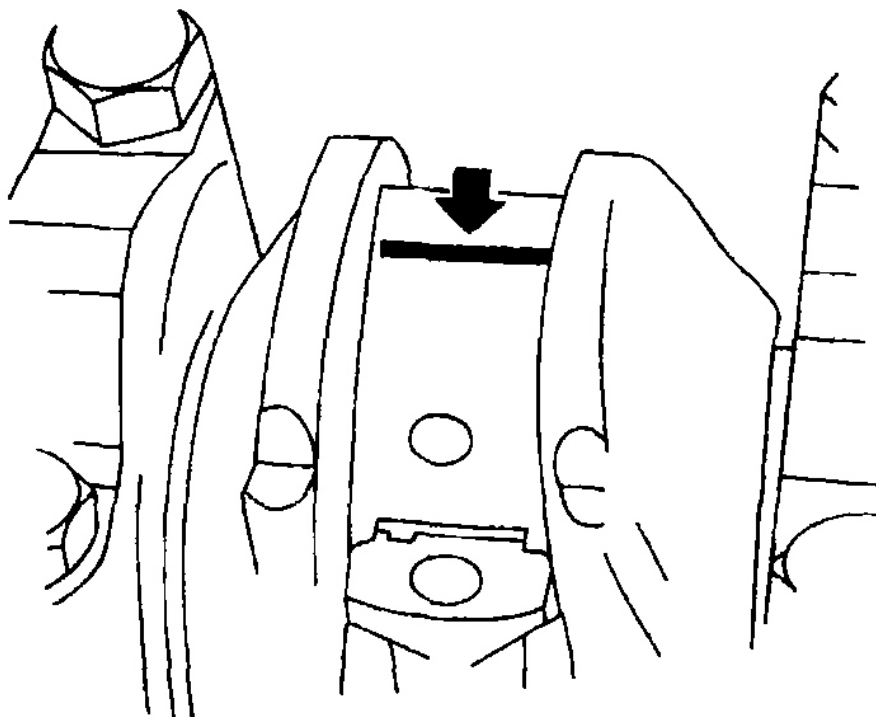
Checking Middle Crankshaft Journal For Permissible Out-Of-Round
